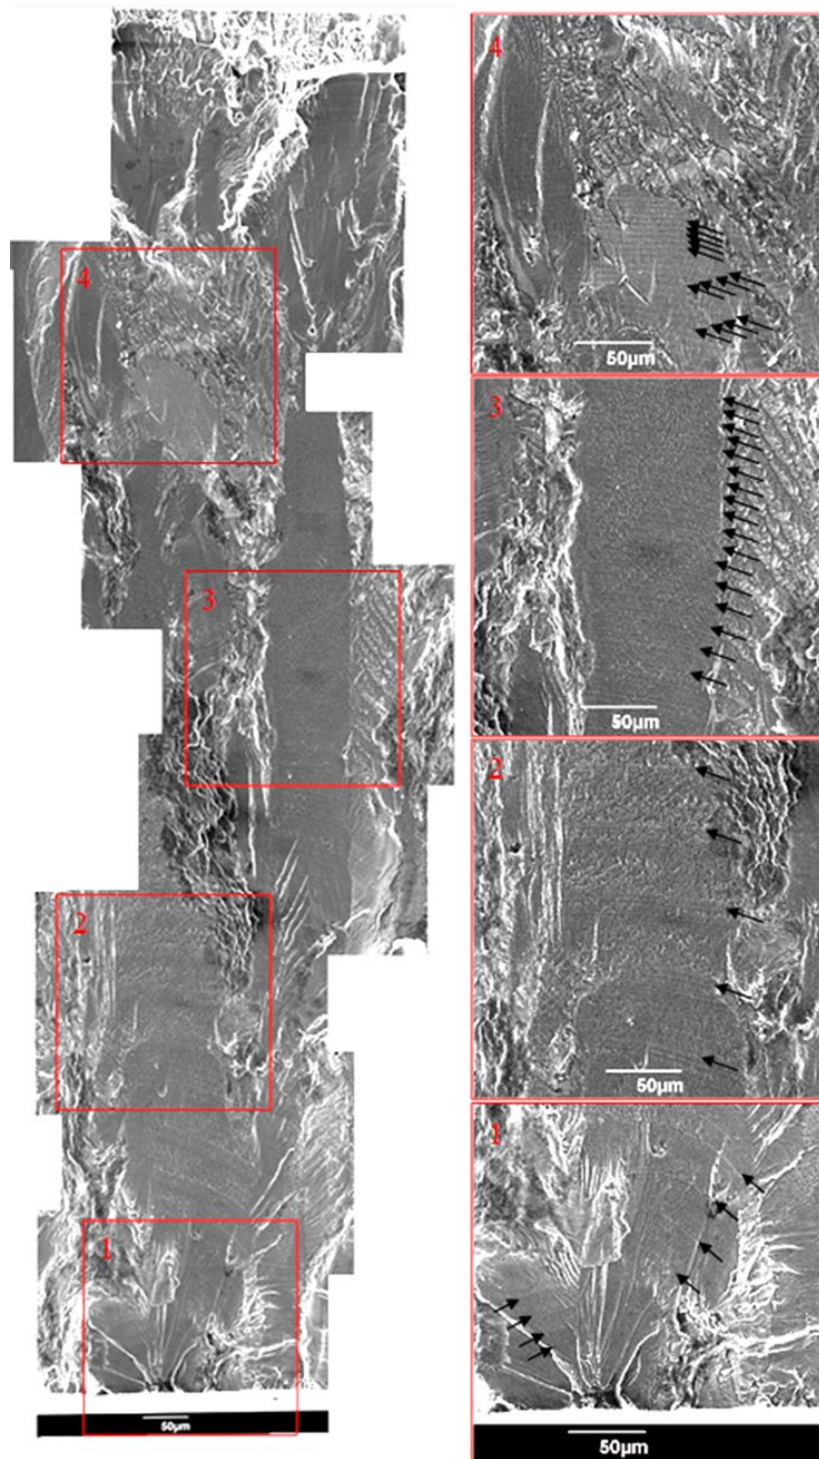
A montage showing the full depth of the fatigue crack perpendicular to the fastener hole bore from a cold-worked specimen origin (right). Expanded views of segments of the fracture surface along the cracks depth are shown on the left. Some of the block markings are indicated with small black arrows. The change in the relative spacing gives an indication of the change in the FCGR.
